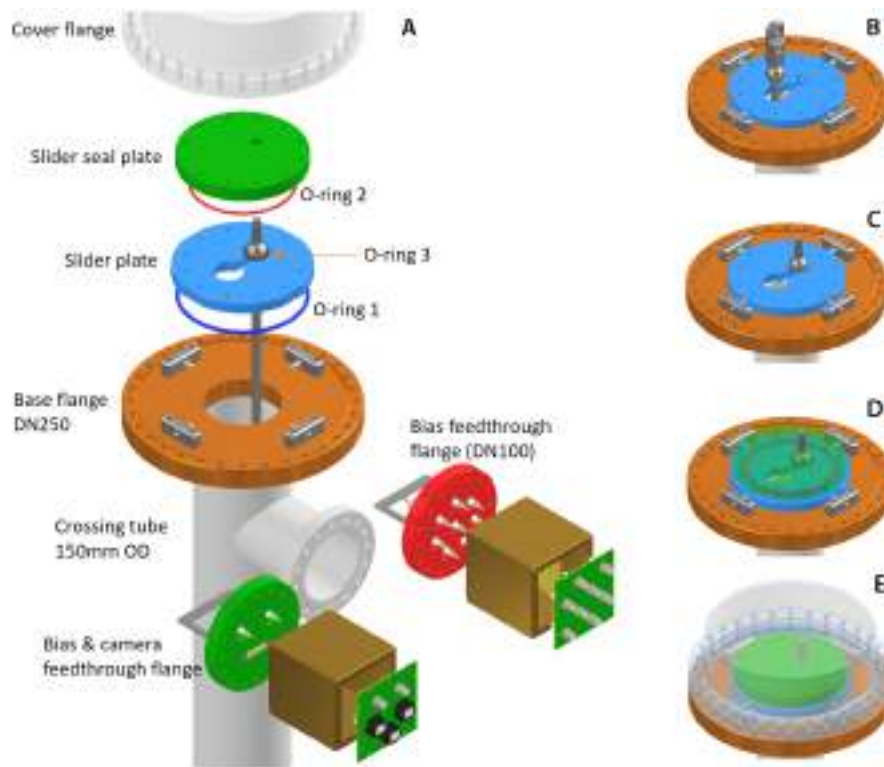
Conceptual design of a field cage support penetration and the associated feedthrough flanges for both mechanical support and electrical connections. Left (A): exploded view of the components of the field cage support penetration. Right (B – E) views of the top feedthrough flange at different stages of the installation.
